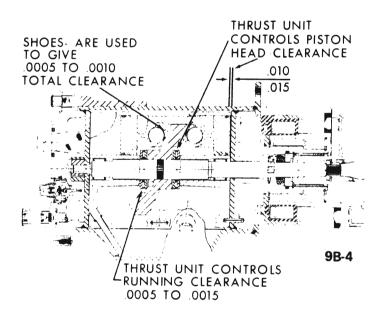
B-4 Compressor Needle Thrust Bearings and Races
